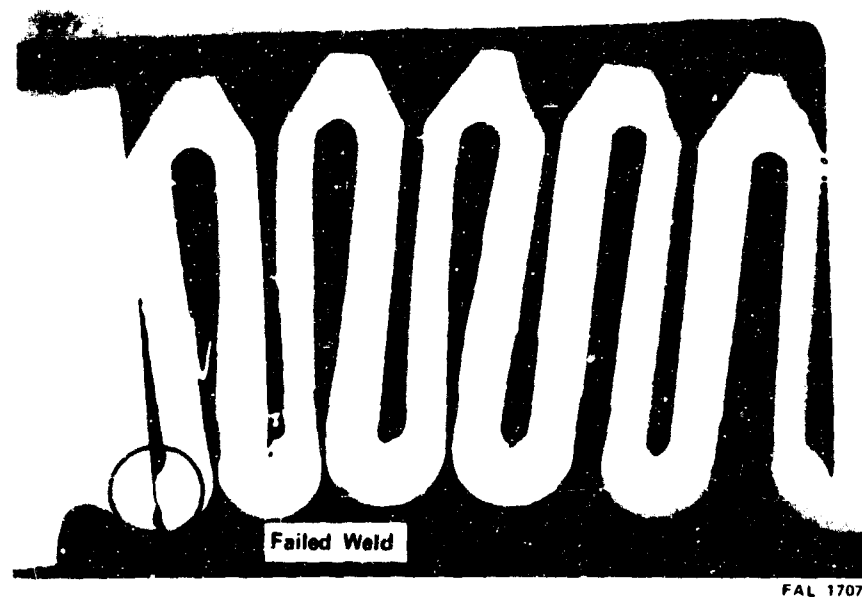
Outer Bellows Weld Fabrication Location
